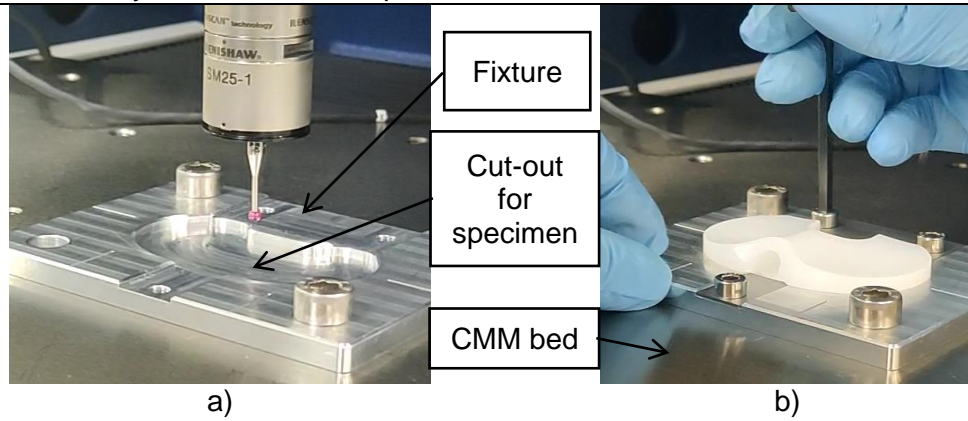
Fixture for holding tibial insert specimens a) without insert and b) with insert.
